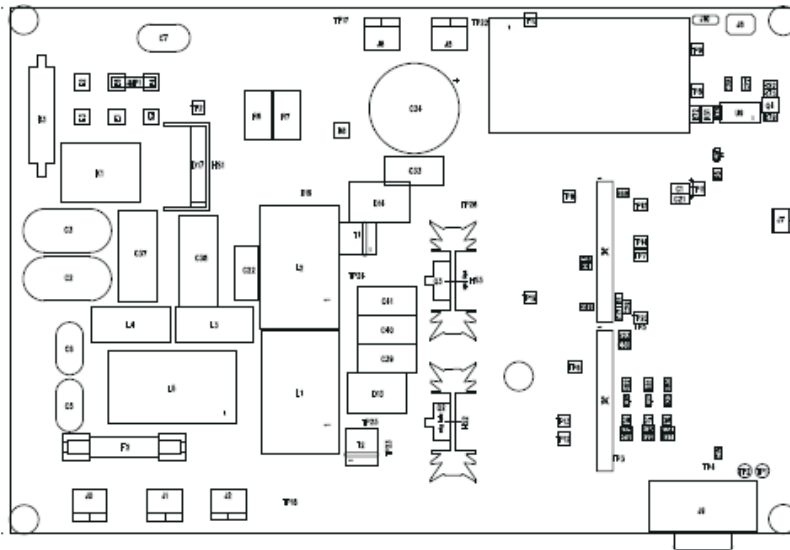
UCD3138PFCEVM-026 Top Layer Assembly Drawing (top view)
